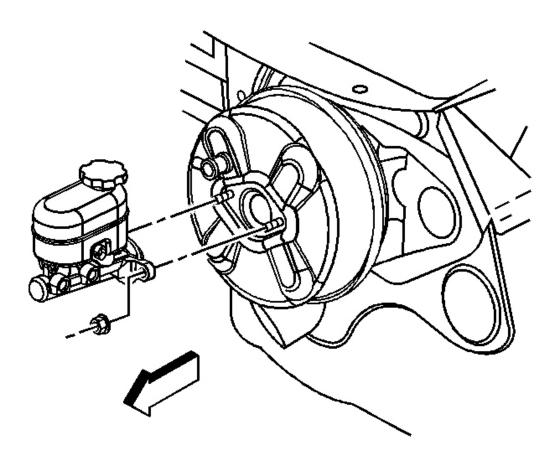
Master Cylinder To Booster View Courtesy of GENERAL MOTORS CORP.
